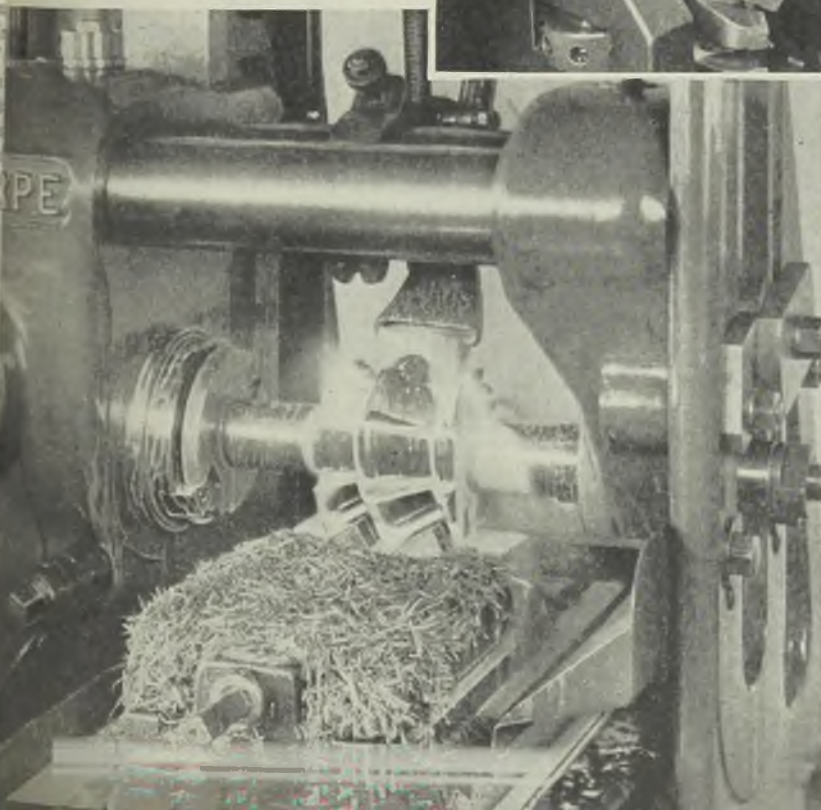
(Left)—This bed-type machine, has independent separate, direct-connected motor drives for spindle, table and coolant pump, and complete electrical control for all table and spindle power movements. On setup like one shown, it will climb mill in one direction, reverse the table then finish mill conventionally during high speed return travel. Photo courtesy Brown & Sharpe Mfg. Co.
